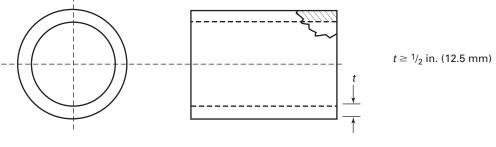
Standard Window Geometries – Part 3
